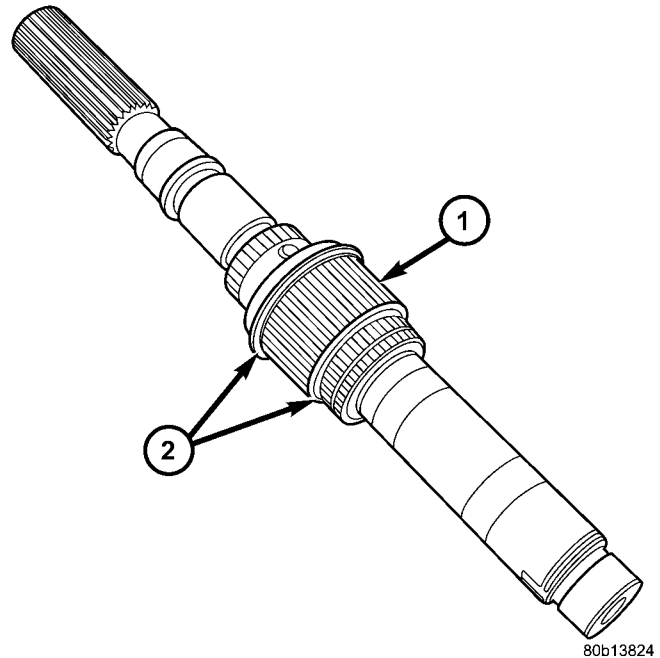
Installing Mainshaft Bearing Rollers and Spacers
